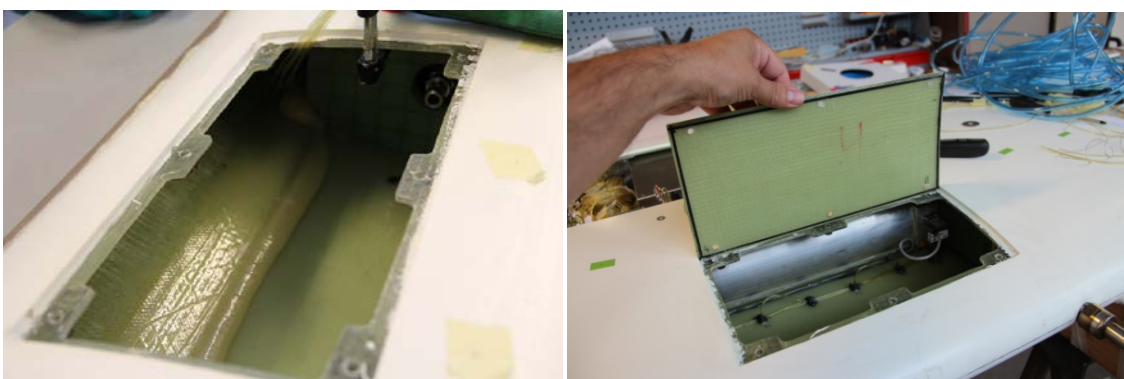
Left: Details in mid section before assembly. View towards tip. Right. Pressure tanks in position and clamp band fixated with glue. View towards hub.
